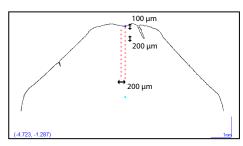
Edge Image Showing Measurement Positions (Red Symbol: Measurement Position, Light Blue Symbol: Center of Screw Shank)
